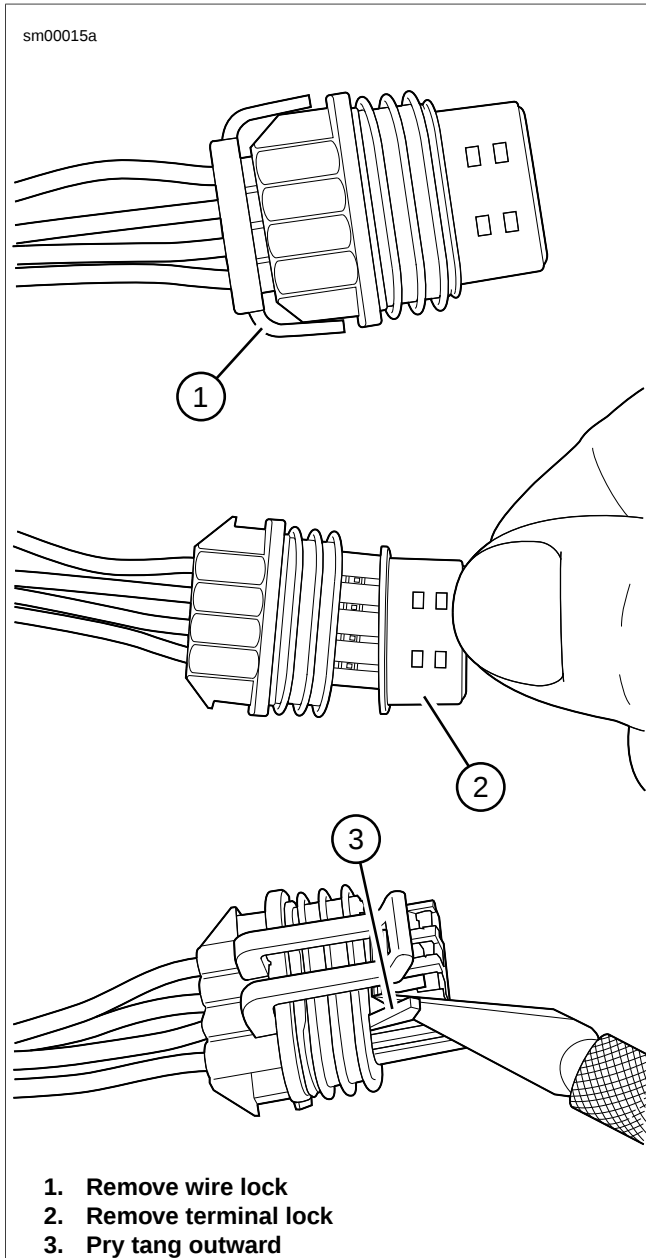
Delphi GT 150 Sealed Connector: Removing Socket Terminals
